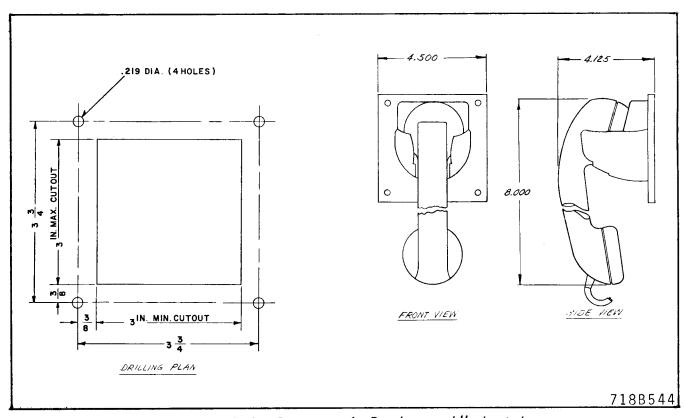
Outline Dimensions for Panel mounted Hookswitch
